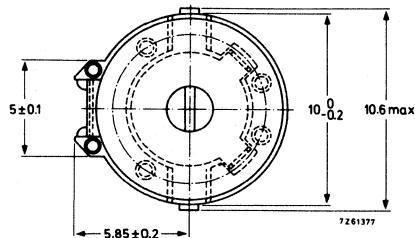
Type with top and bottom adjustment, rotor tags over 90°
